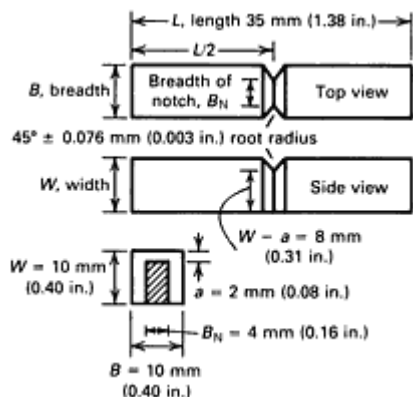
Standard side-grooved Charpy V-notch test specimen used for three- and four-point bend tests
